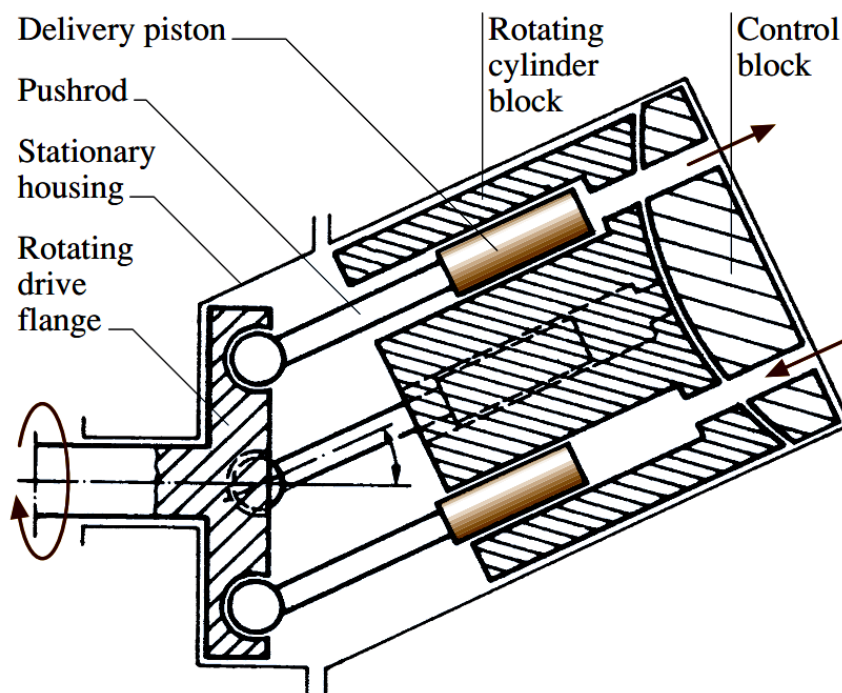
Bent-Axis Piston Pump [Springer handbook of Mechanical Engineering] (2)
